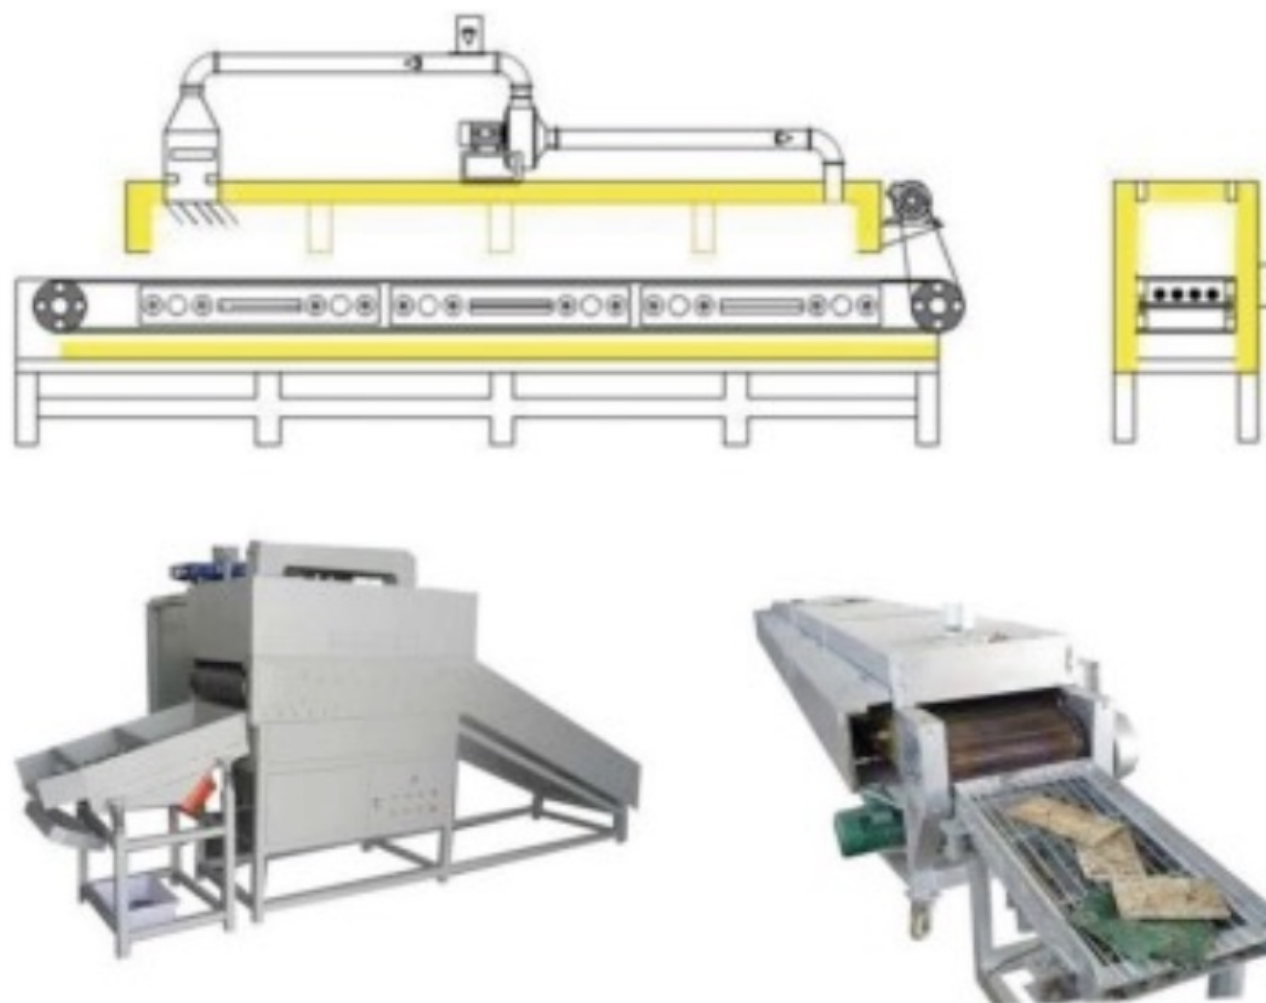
Schematic view and photos of tunnel-type, heated dismantling machines [29]
